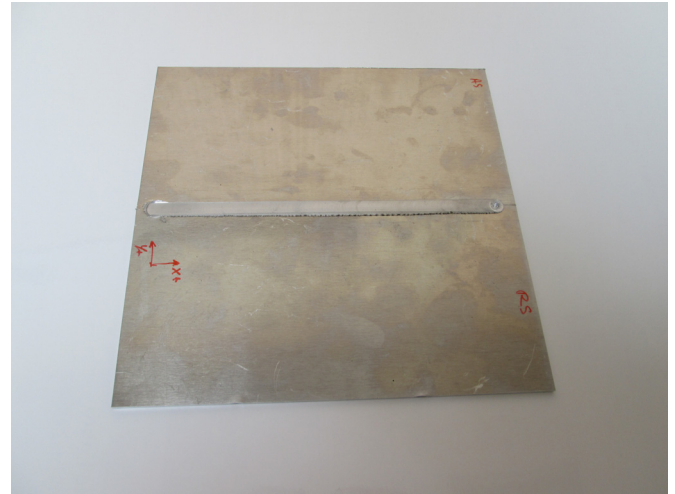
3-mm thick AA 5754-H22 FSWed coupons.
